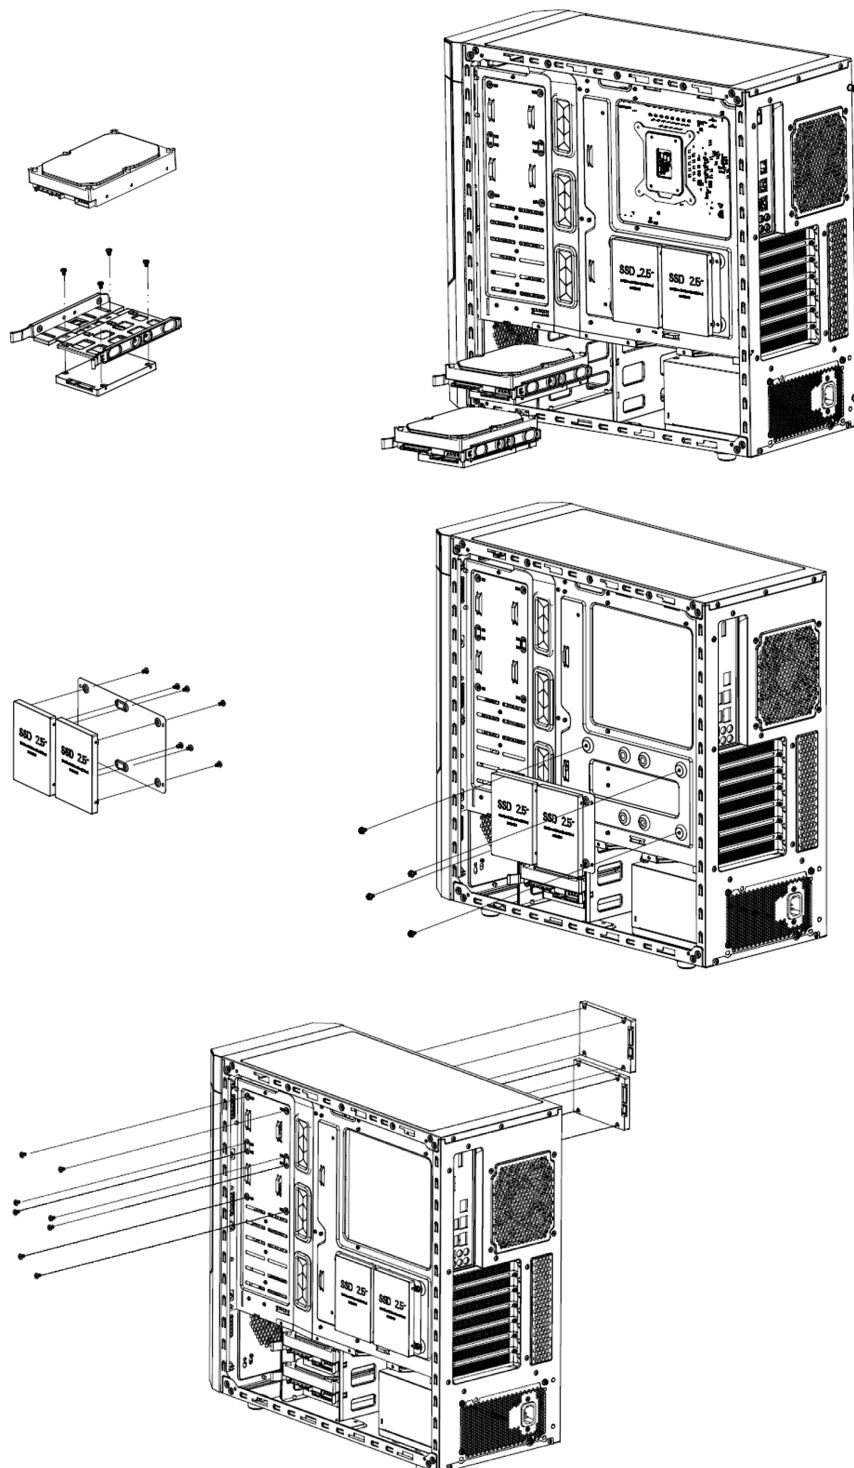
Installing Drives and Mounting Brackets into the Cage
